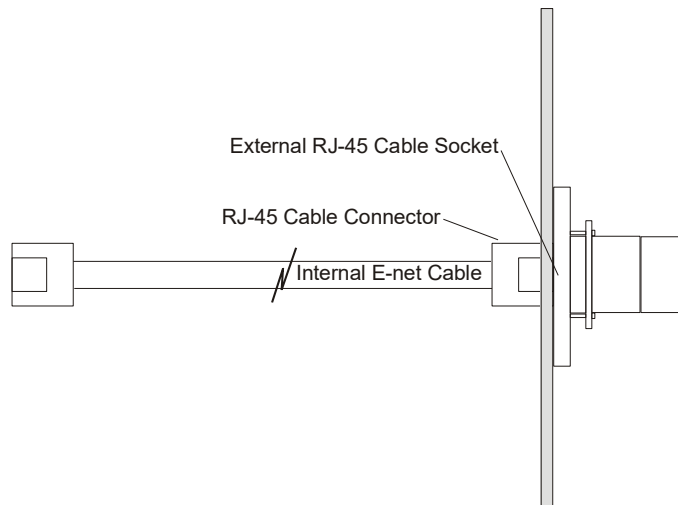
Internal Ethernet cable attached to external RJ-45 Coupler Assembly socket
